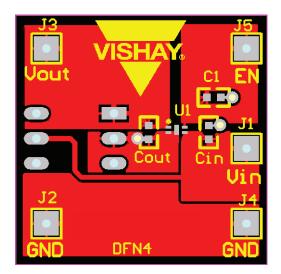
Top, TDFN4 1.2 mm x 1.6 mm PCB Layout
